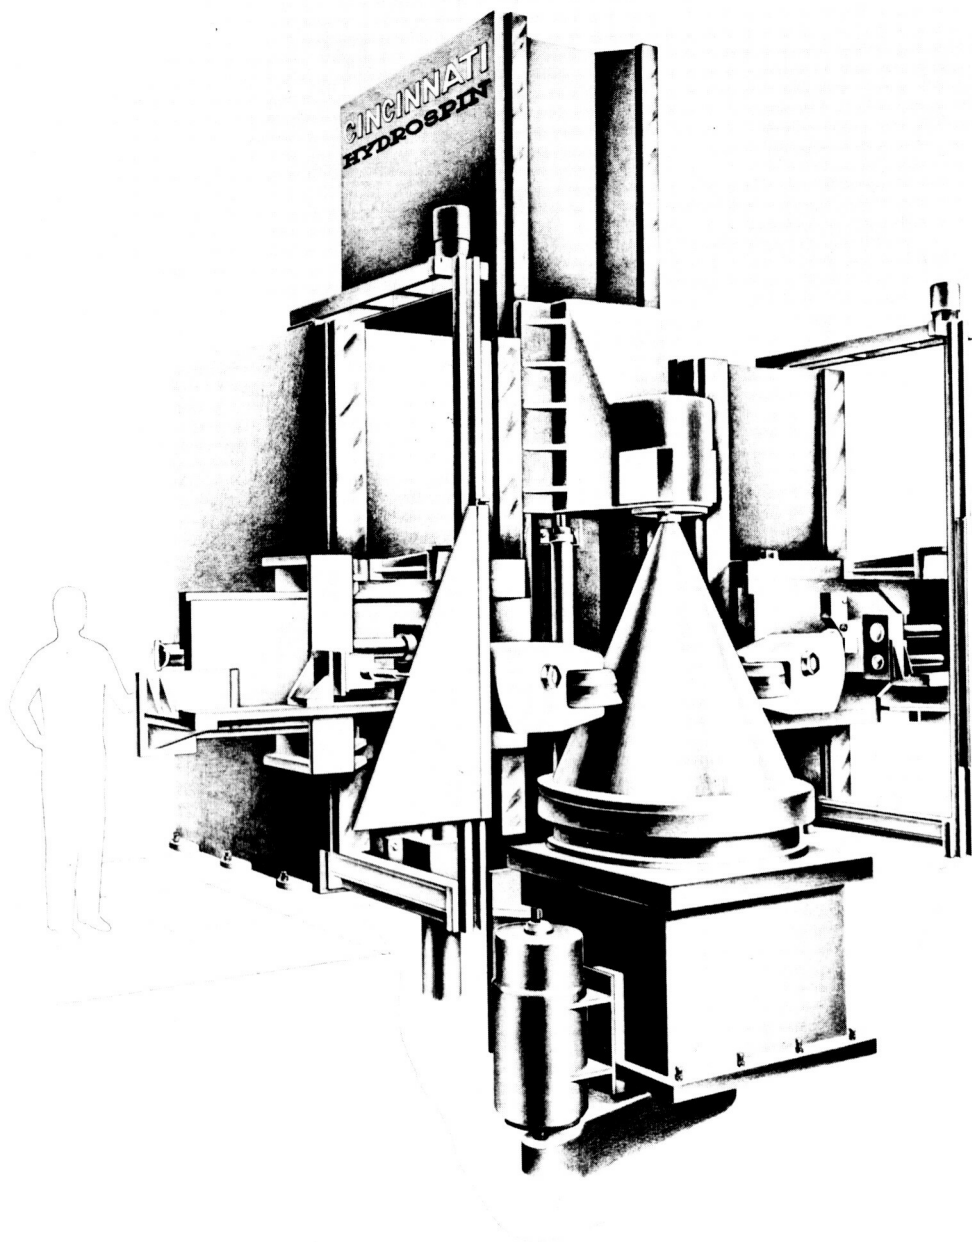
CINCINNATI MILLING MACHINE COMPANY 70 X 72-INCH VERTICAL HYDROSPIN MACHINE (REF. 84)
